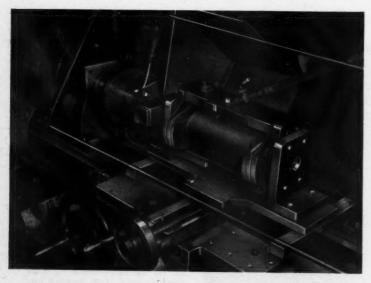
One form of super-finishing attachment, here seen applied to a lathe for finishing a bore in a cam ring, has a stone holder which is oscillated by the movements of a piston in a horizontal air cylinder
